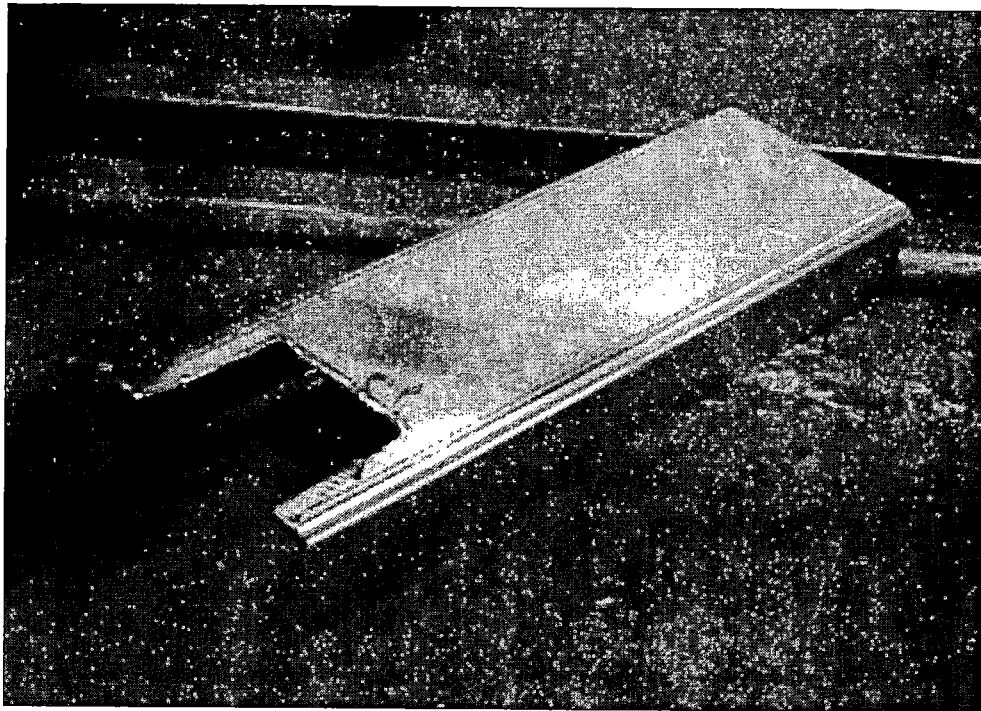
12-Gage 504L Stainless Steel Wear Liners
